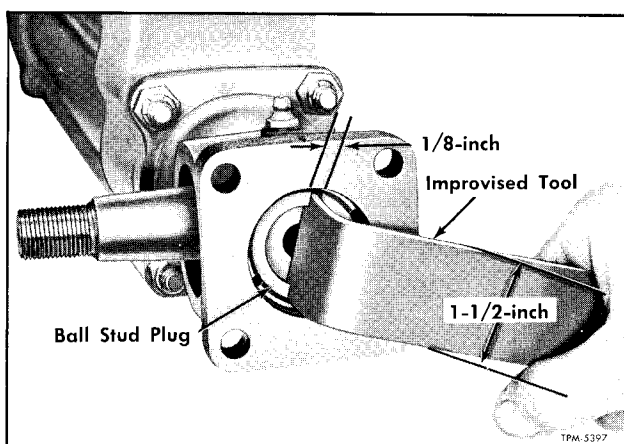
Removing Ball Stud End Plug With Improvised Tool
